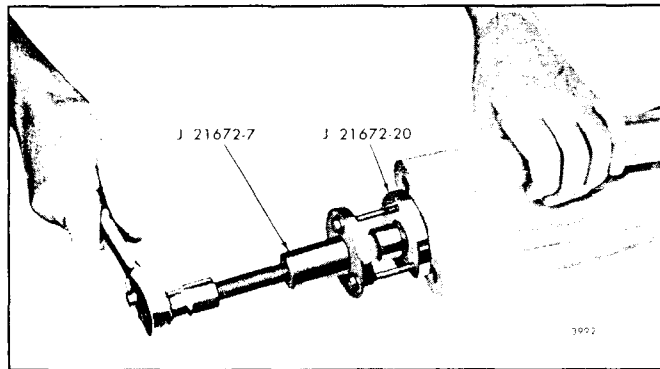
Removing Oil Seal Sleeve and Roller Bearing Inner Race from Rotor Shaft
